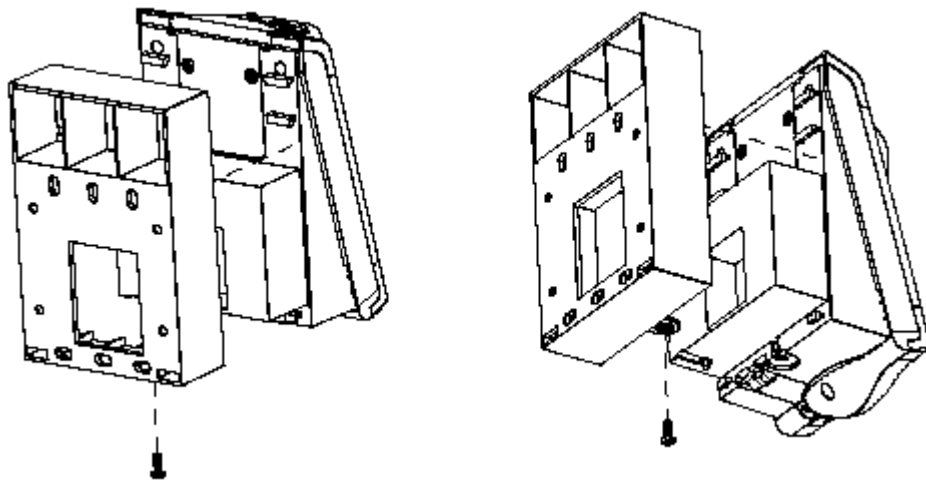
V-Flex 4G Recessed-mount Mounting Plate
